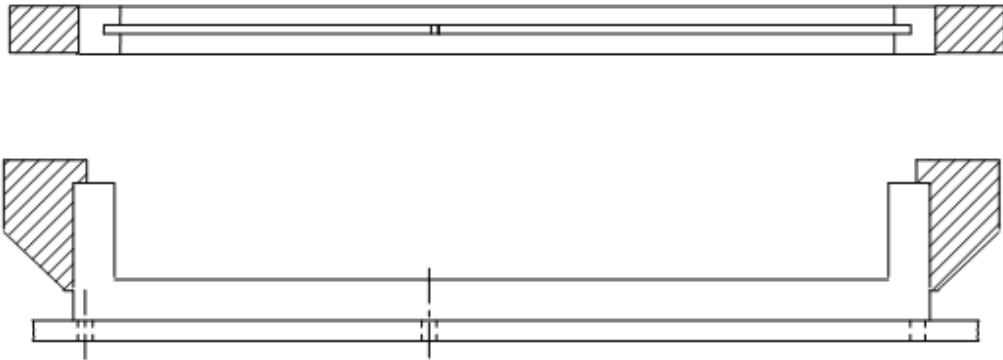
Connector Outline Refer to JEDEC SO-007 for details.
